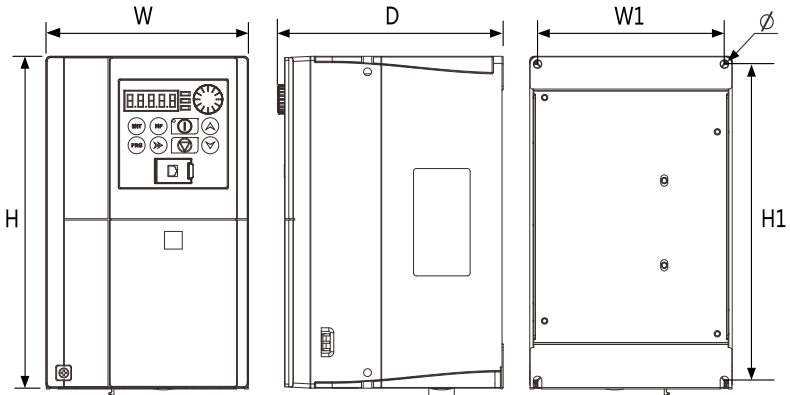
Installation Dimensions of Frame A/B/C/D
